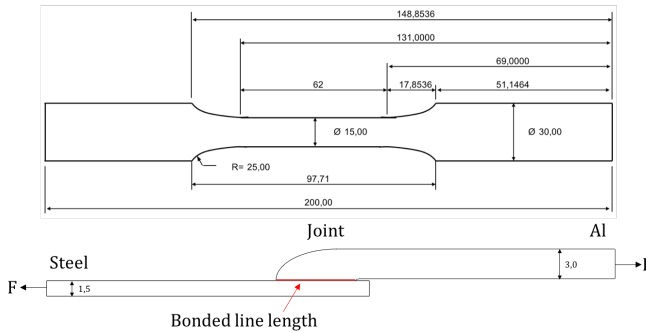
Dimensions of the tensile test specimens given in *mm*.
